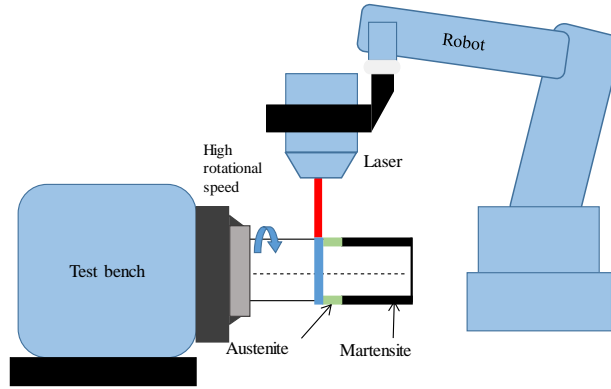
Basic configuration of the laser hardening of a cylindrical part.
